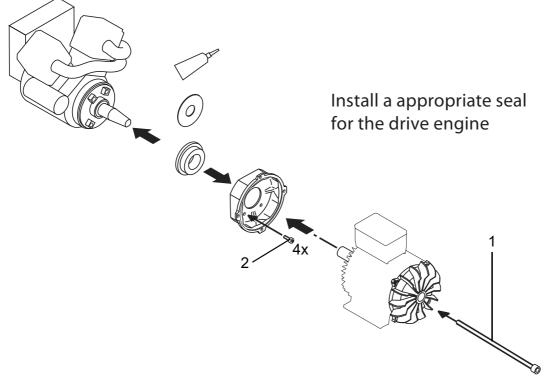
Assembly of brushless single-bearing generators with tension bolts (1)
